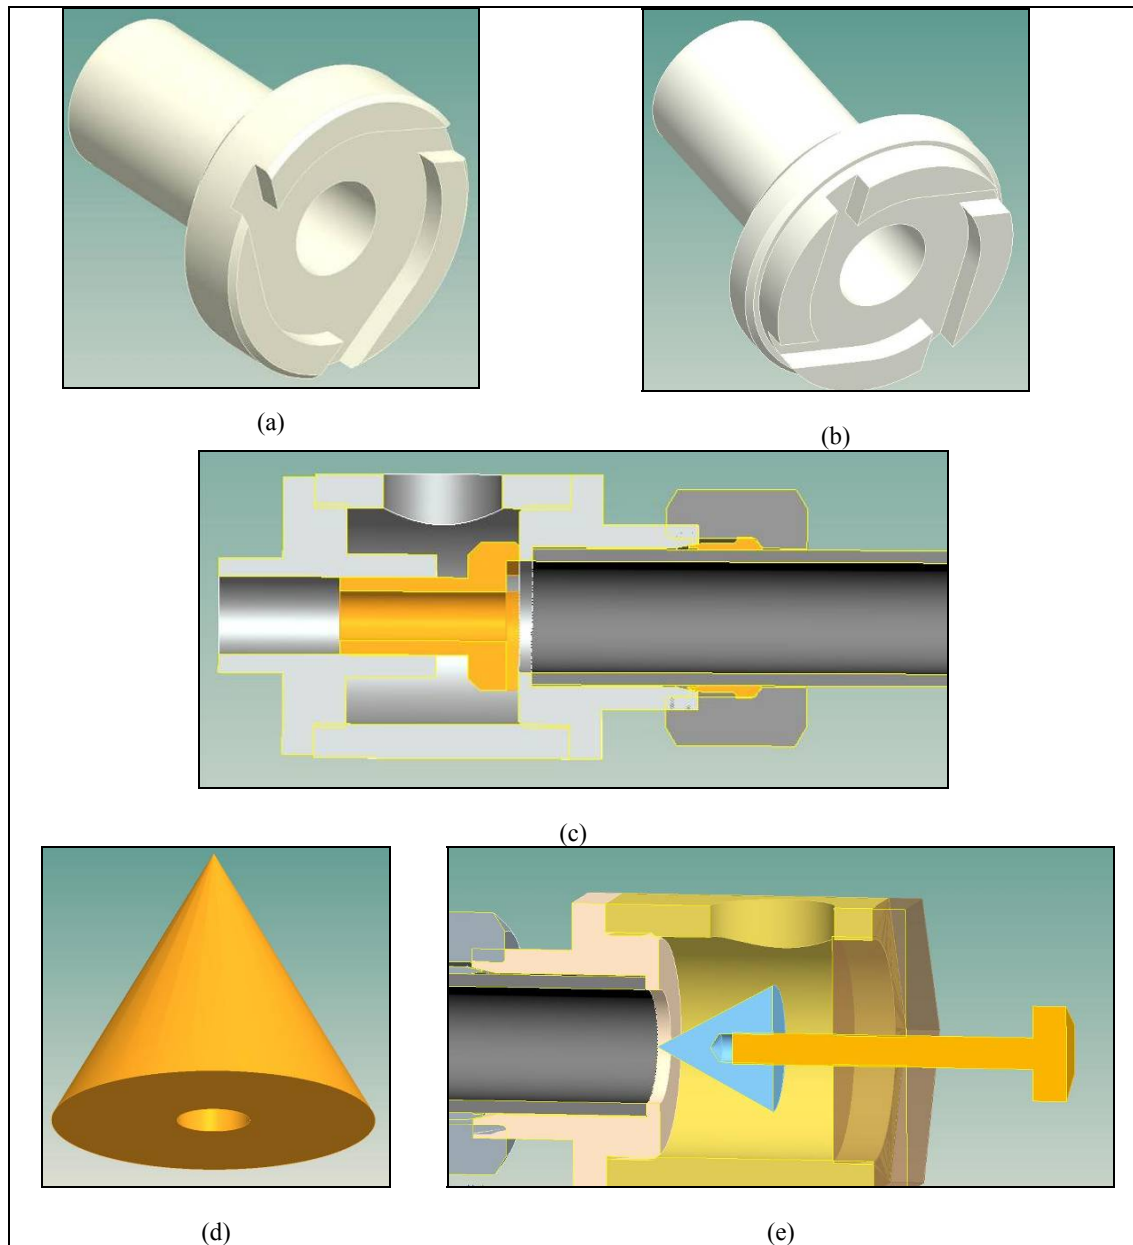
(a), (b): Design pictures of generators with 3 and 4 inlet nozzles, and its detailed view in tube assembly (c). One of vortex cone pictures (d) and its detailed, cross-sectional view in hot side of the tube (e).
